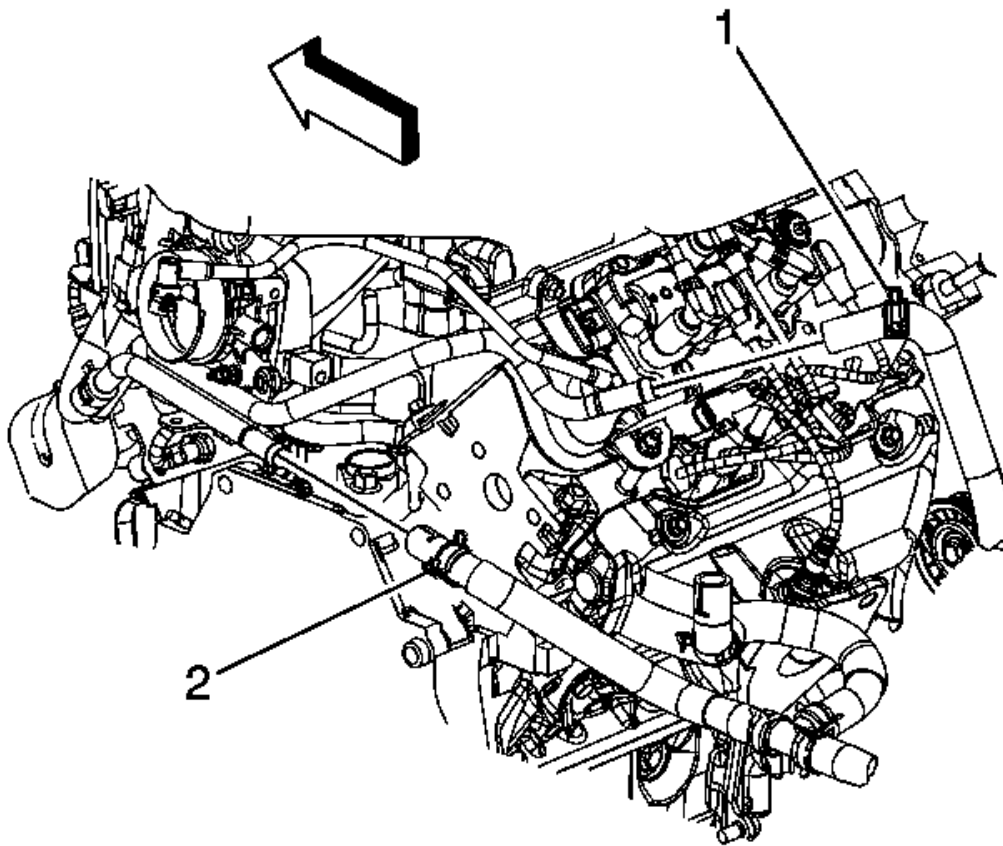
View Of Heater Inlet (1) And Outlet (2) Hose Clamps
